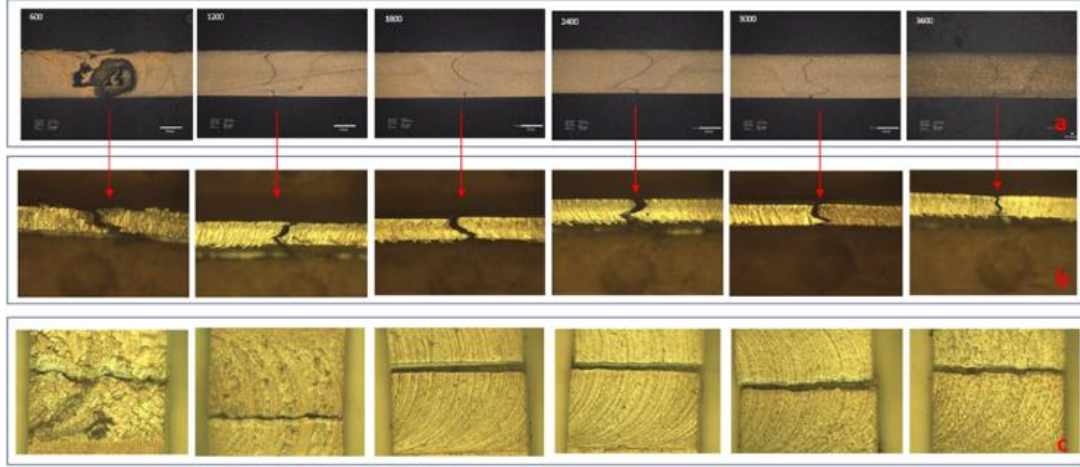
Joining zone microcrack (a), Joining zone front view after fracture (b), Joining zone top view after fracture (c).
